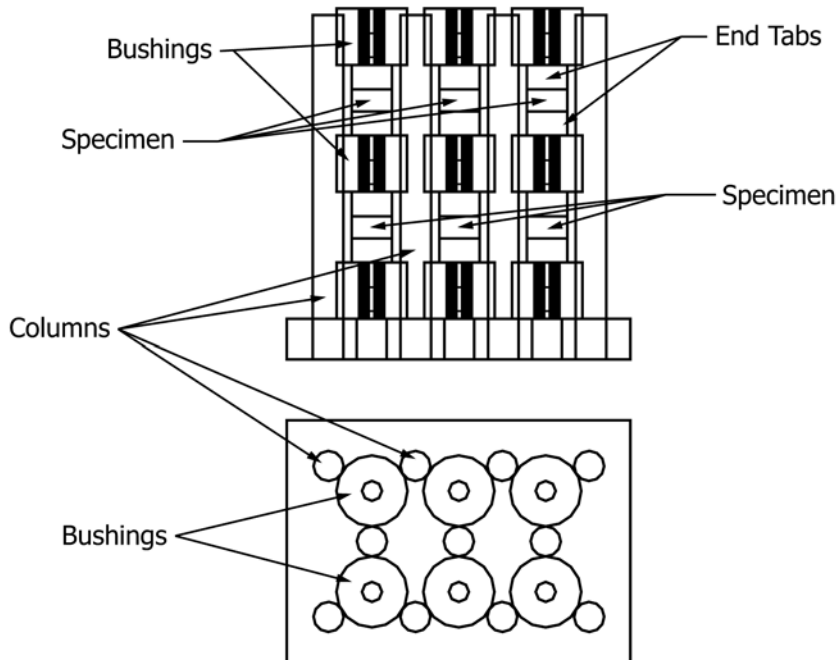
Drawing of Alignment and Bonding Fixture (showing 12 specimens)
